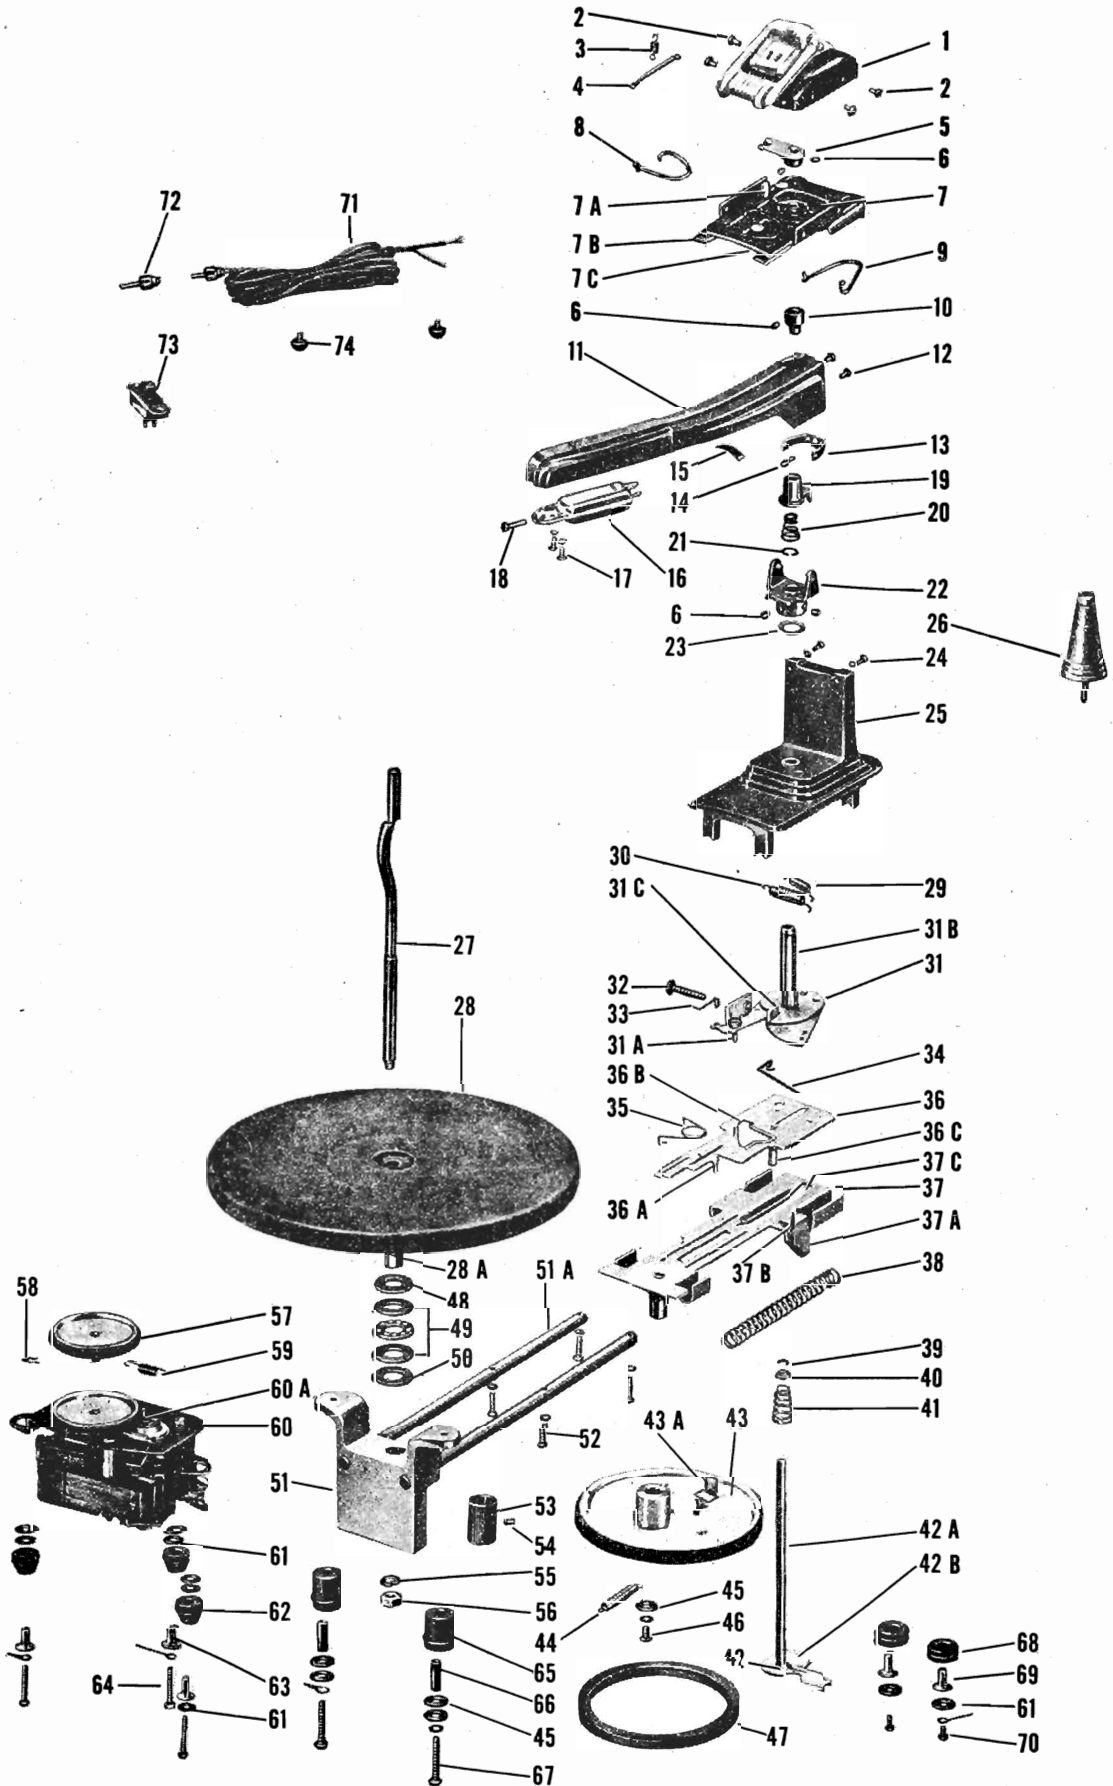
RECORD CHANGER, EXPLODED VIEW
